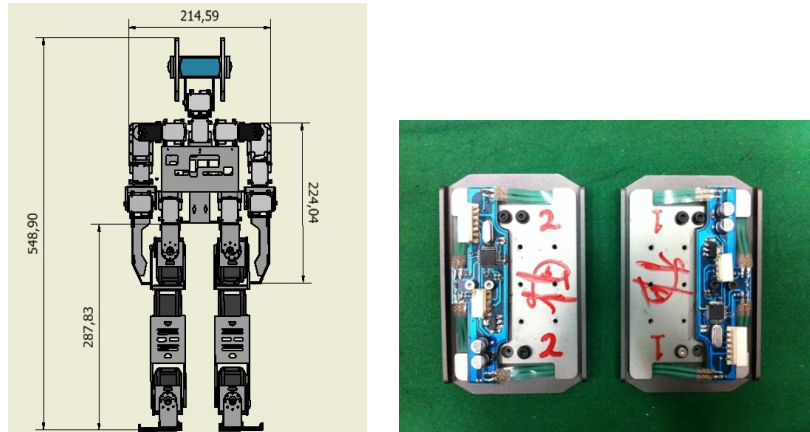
Mechanical dimensions and the FSR sensors on the soles of feet
